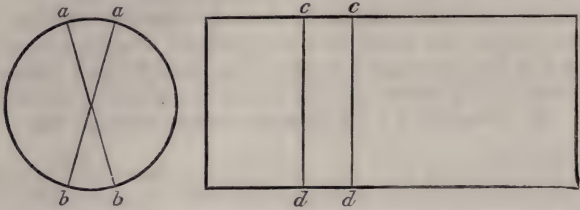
Diagram for the Resistance of a Flat-headed Cylinder to Bursting Pressure.
